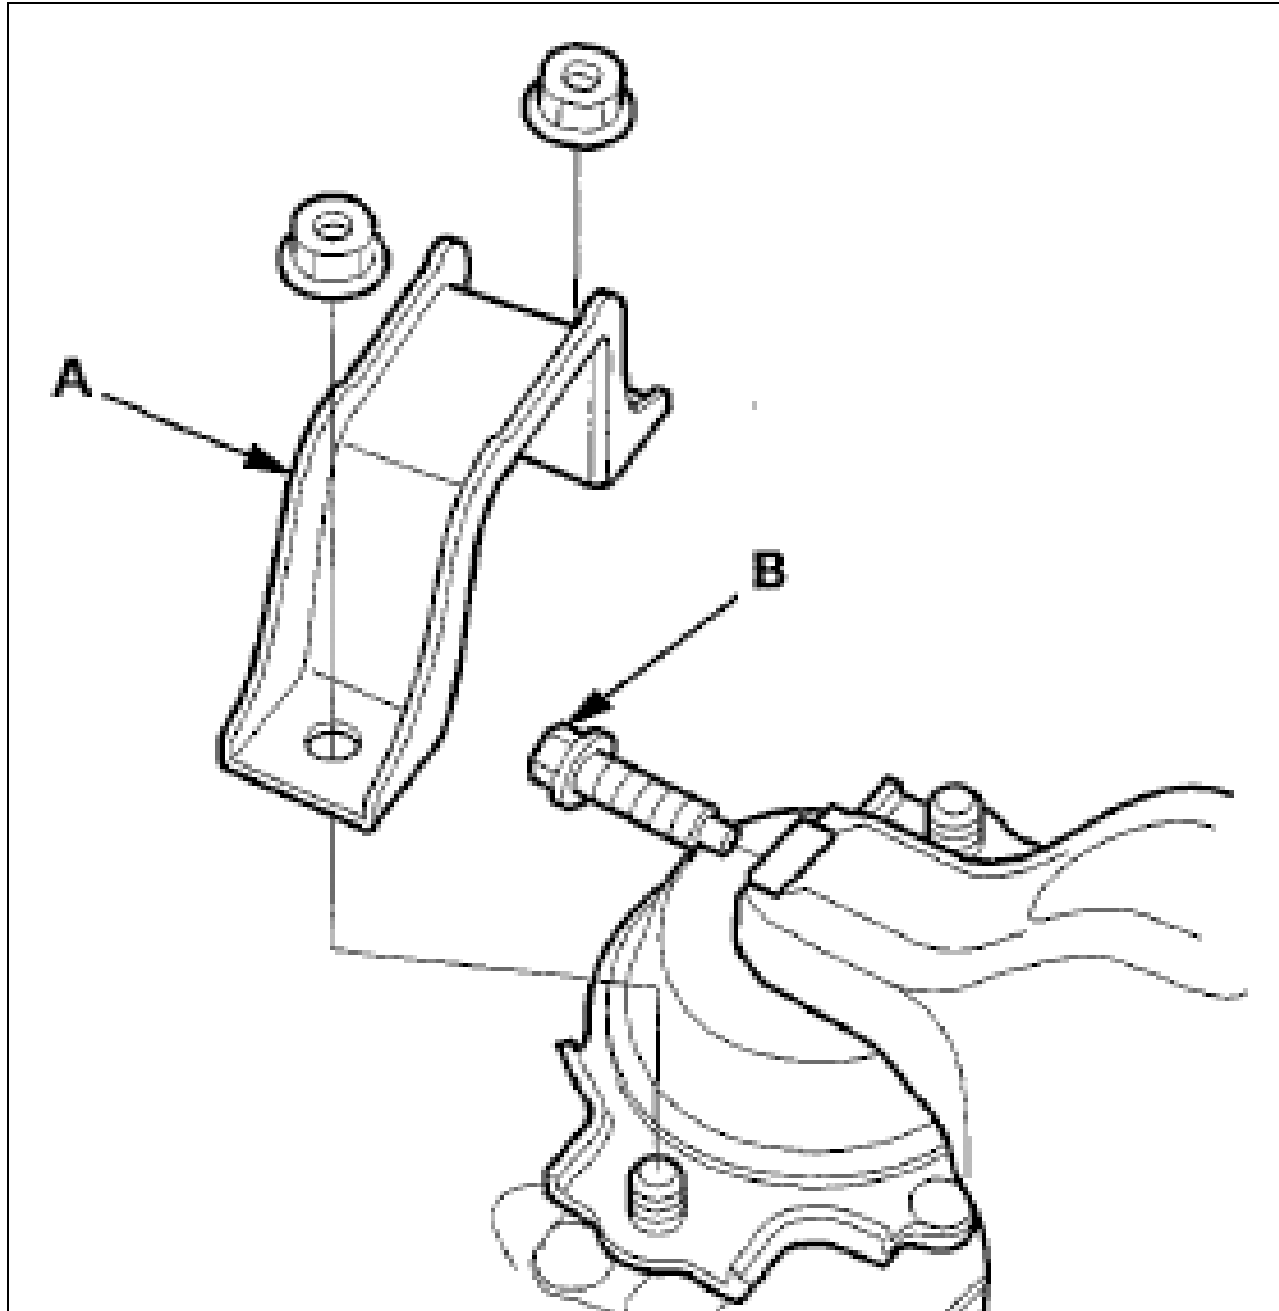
Identifying Engine Hanger Adapters And Engine Support Beams
